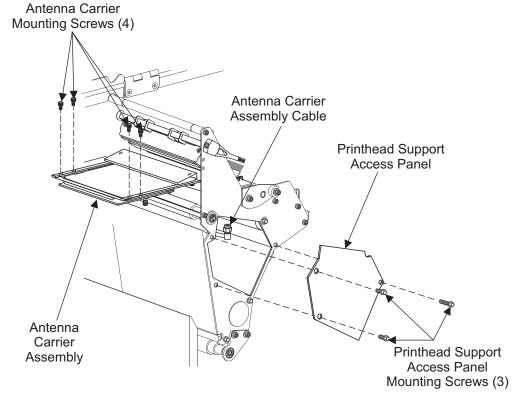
Remove/Install the Antenna Carrier Assembly
